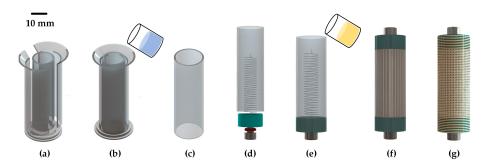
Fabrication process of DDM. (a) Printing using a 3D printer and assembly of the mold of silicone rubber shell. (b) Mixing, pouring, and curing after vacuum of silica gel components A and B. (c) Demolding of silicone rubber shell. (d) Placement of heating wire and other components. (e) Pouring and curing of PCMs under normal temperature. (f) Packaging of the upper end cover. (g) Formation of the restricted layer through the close winding of aramid fiber.
